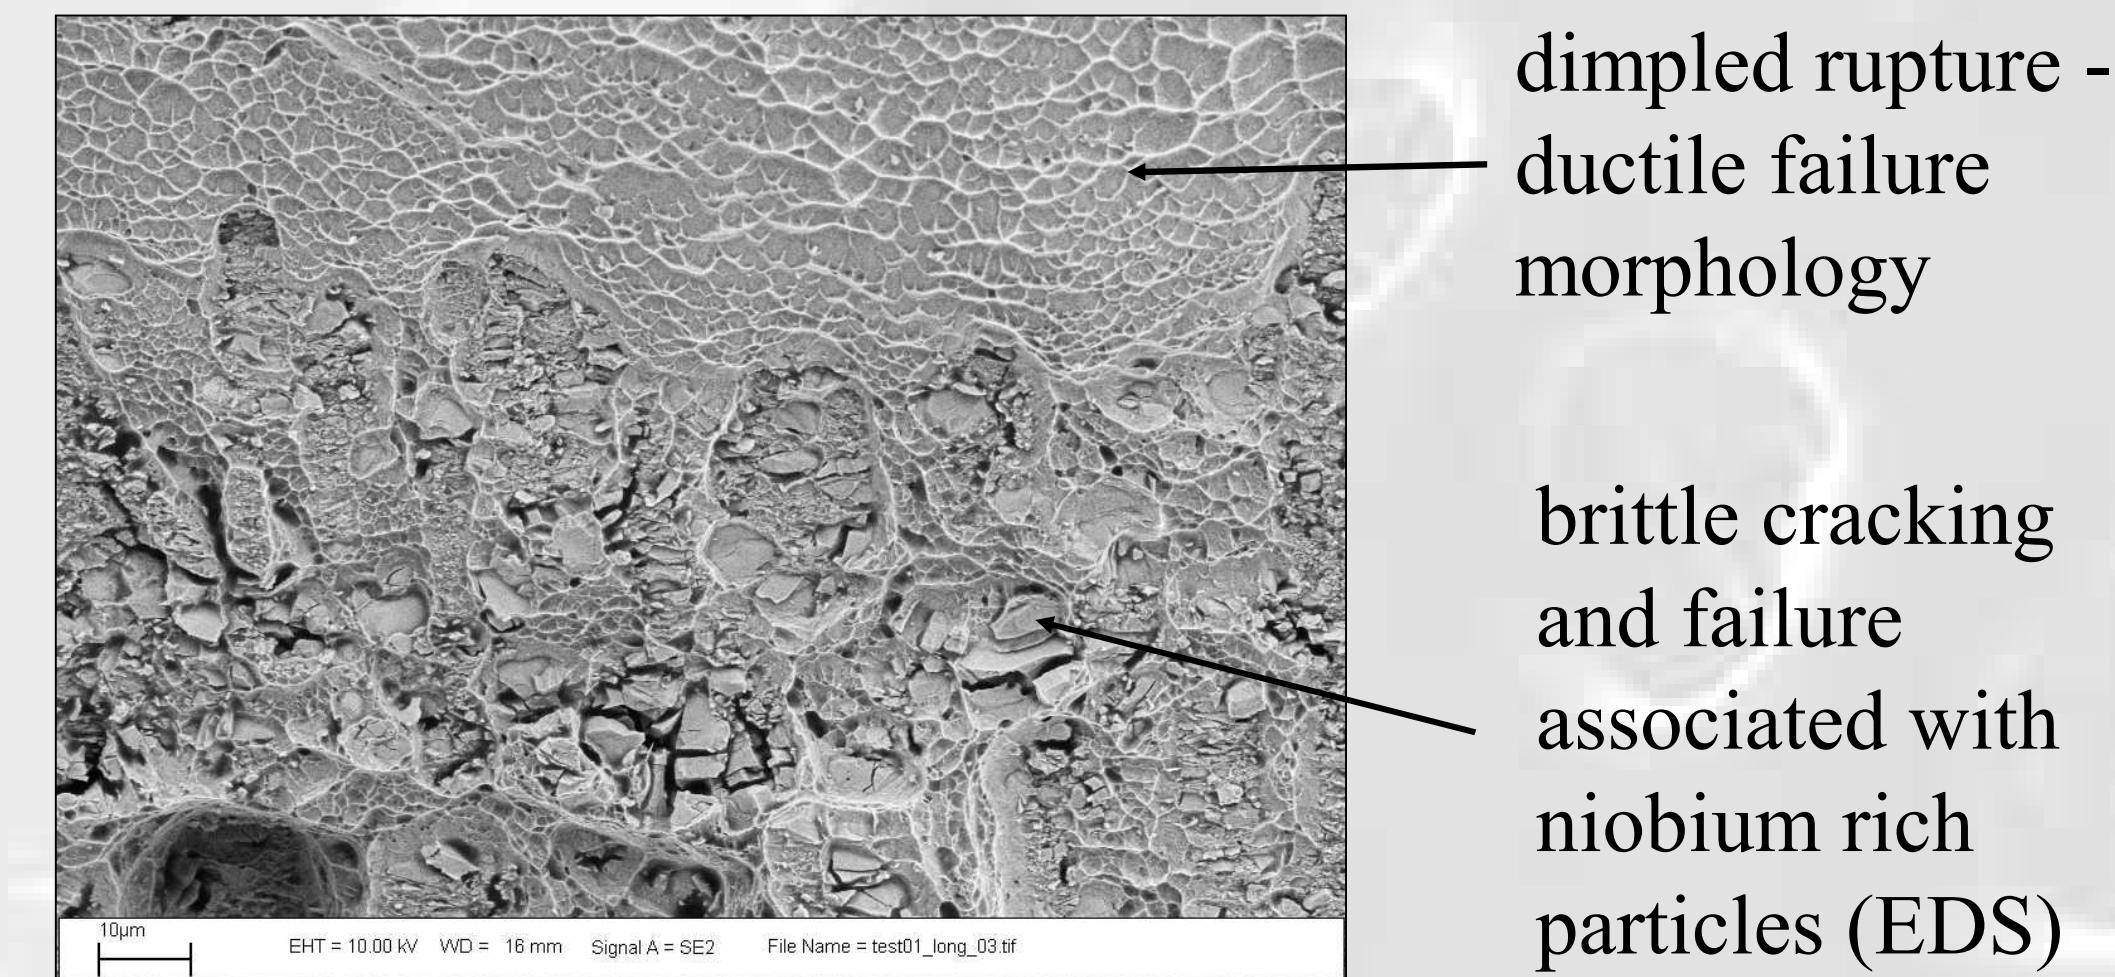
Microstructure of fracture surface of extrusion-cut inconel 718 alloy after tensile test.
